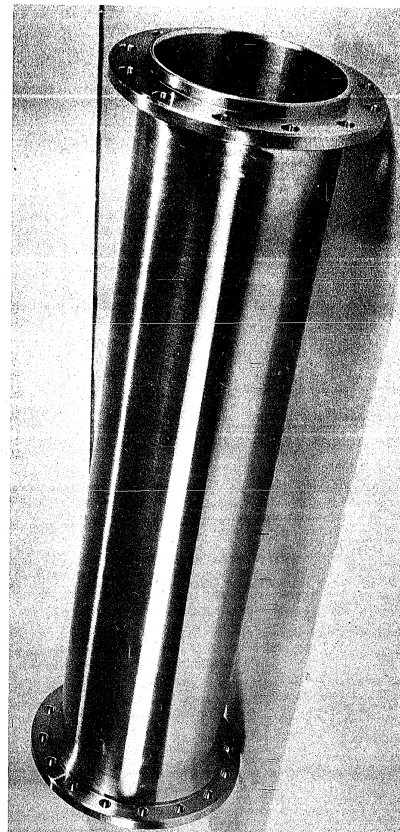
P/N 226970 - SHAFT, TURBINE ROTOR FRONT
